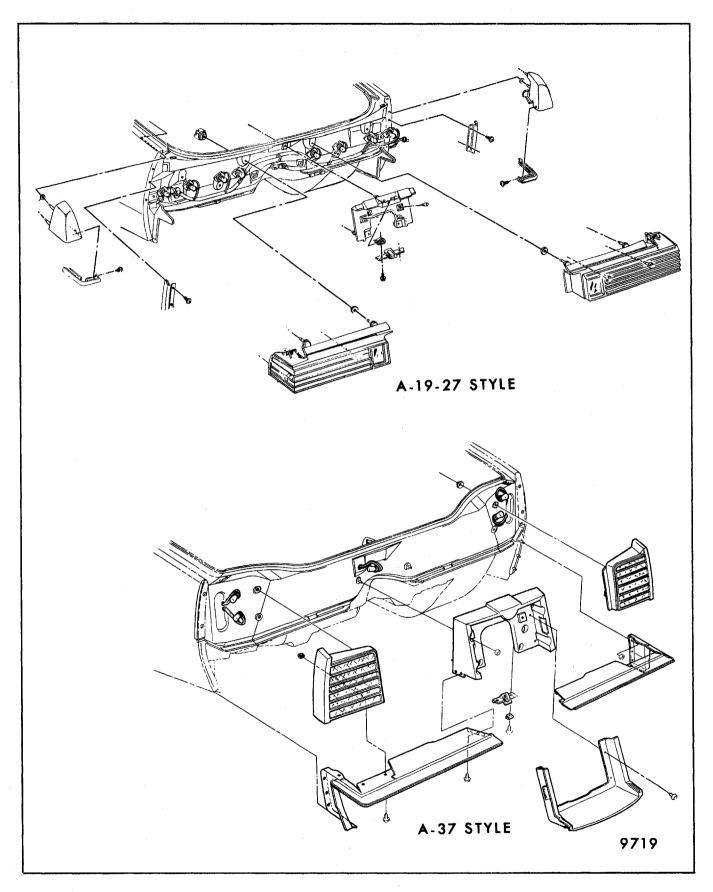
Exterior Lamp Installation - Pontiac Styles
